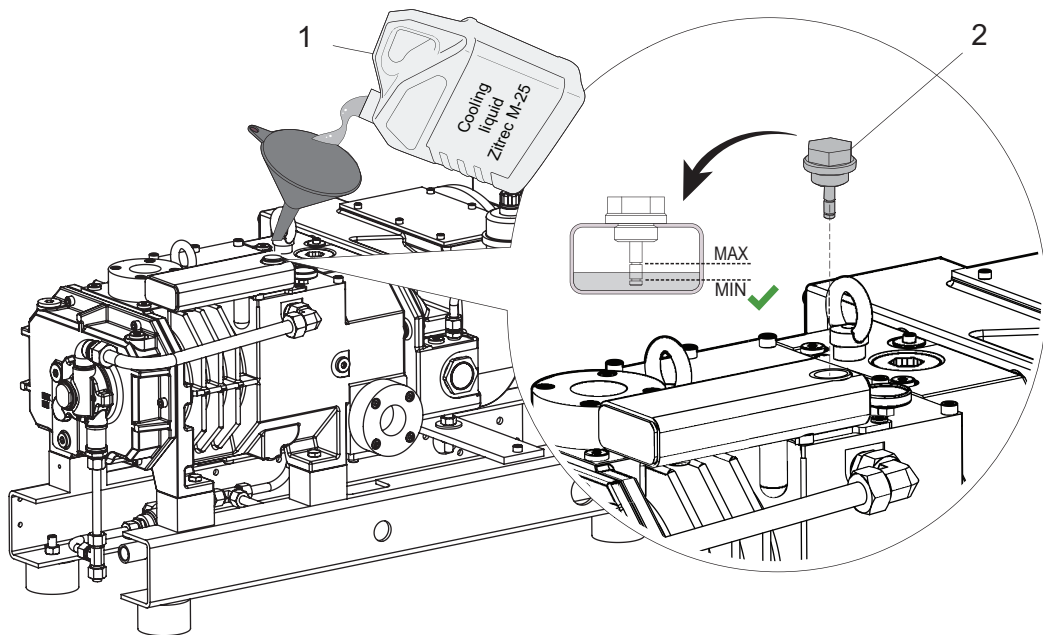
Filling up the cooling liquid on Hepta 100 P
